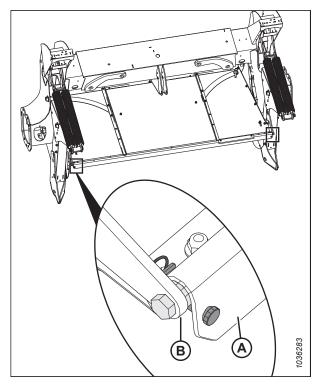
Forming Shield – for use with R216 Rotary Disc Header
